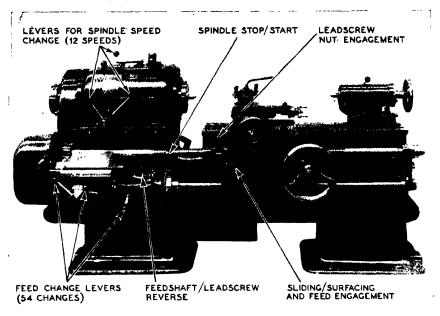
Denham "Superspeed" lathe with $6\frac{1}{4}$ -in. centres and fitted with 54-change gearbox (Denham's Engineering Co., Ltd.)
